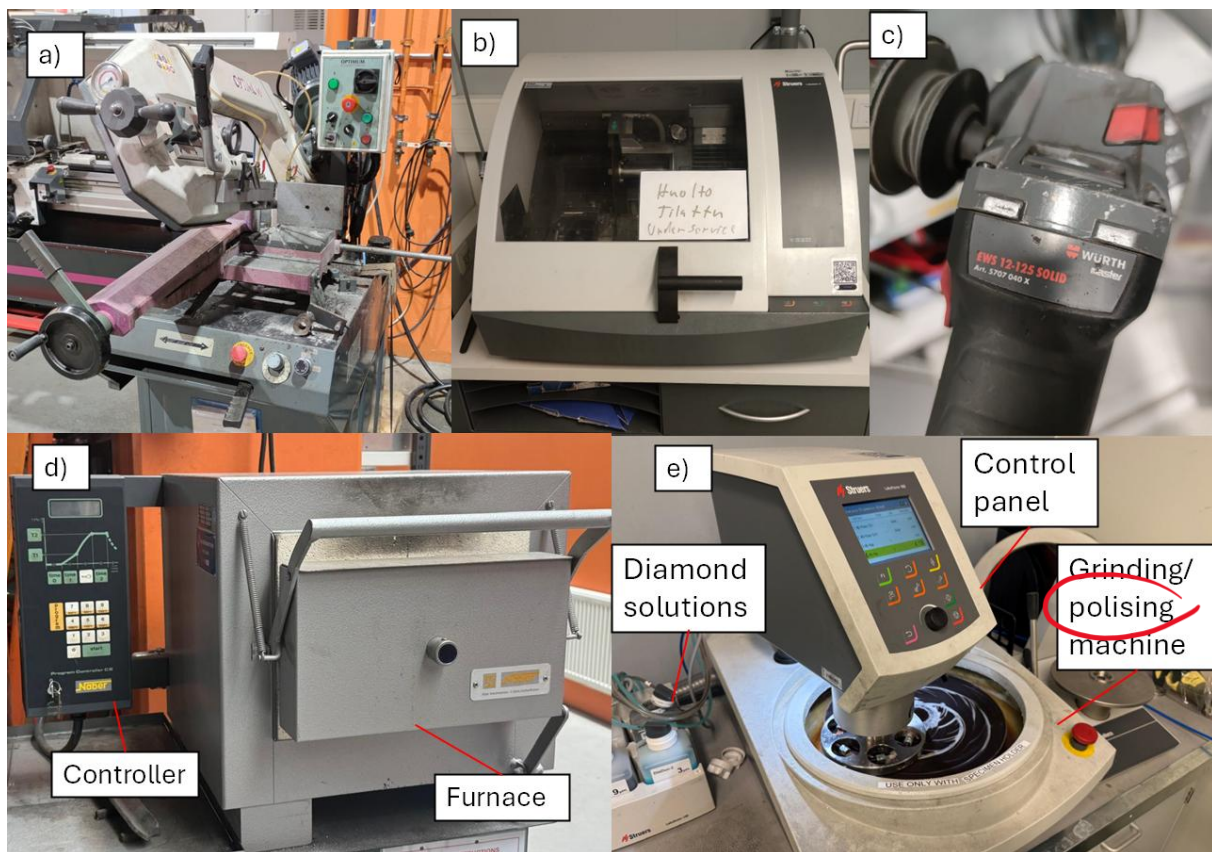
Images of machinery used to cut, heat treat, grind and polish 316L-CuCrZr material: a) metal bandsaw, b) cut-off machine, c) angle grinder, d) heat treatment machinery, e) grinding and polishing equipment.
